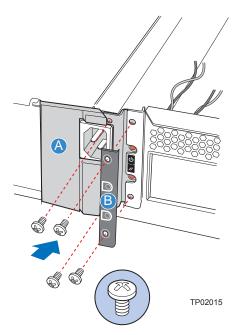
Securing Blanking Plate and Switch Cover to Chassis
